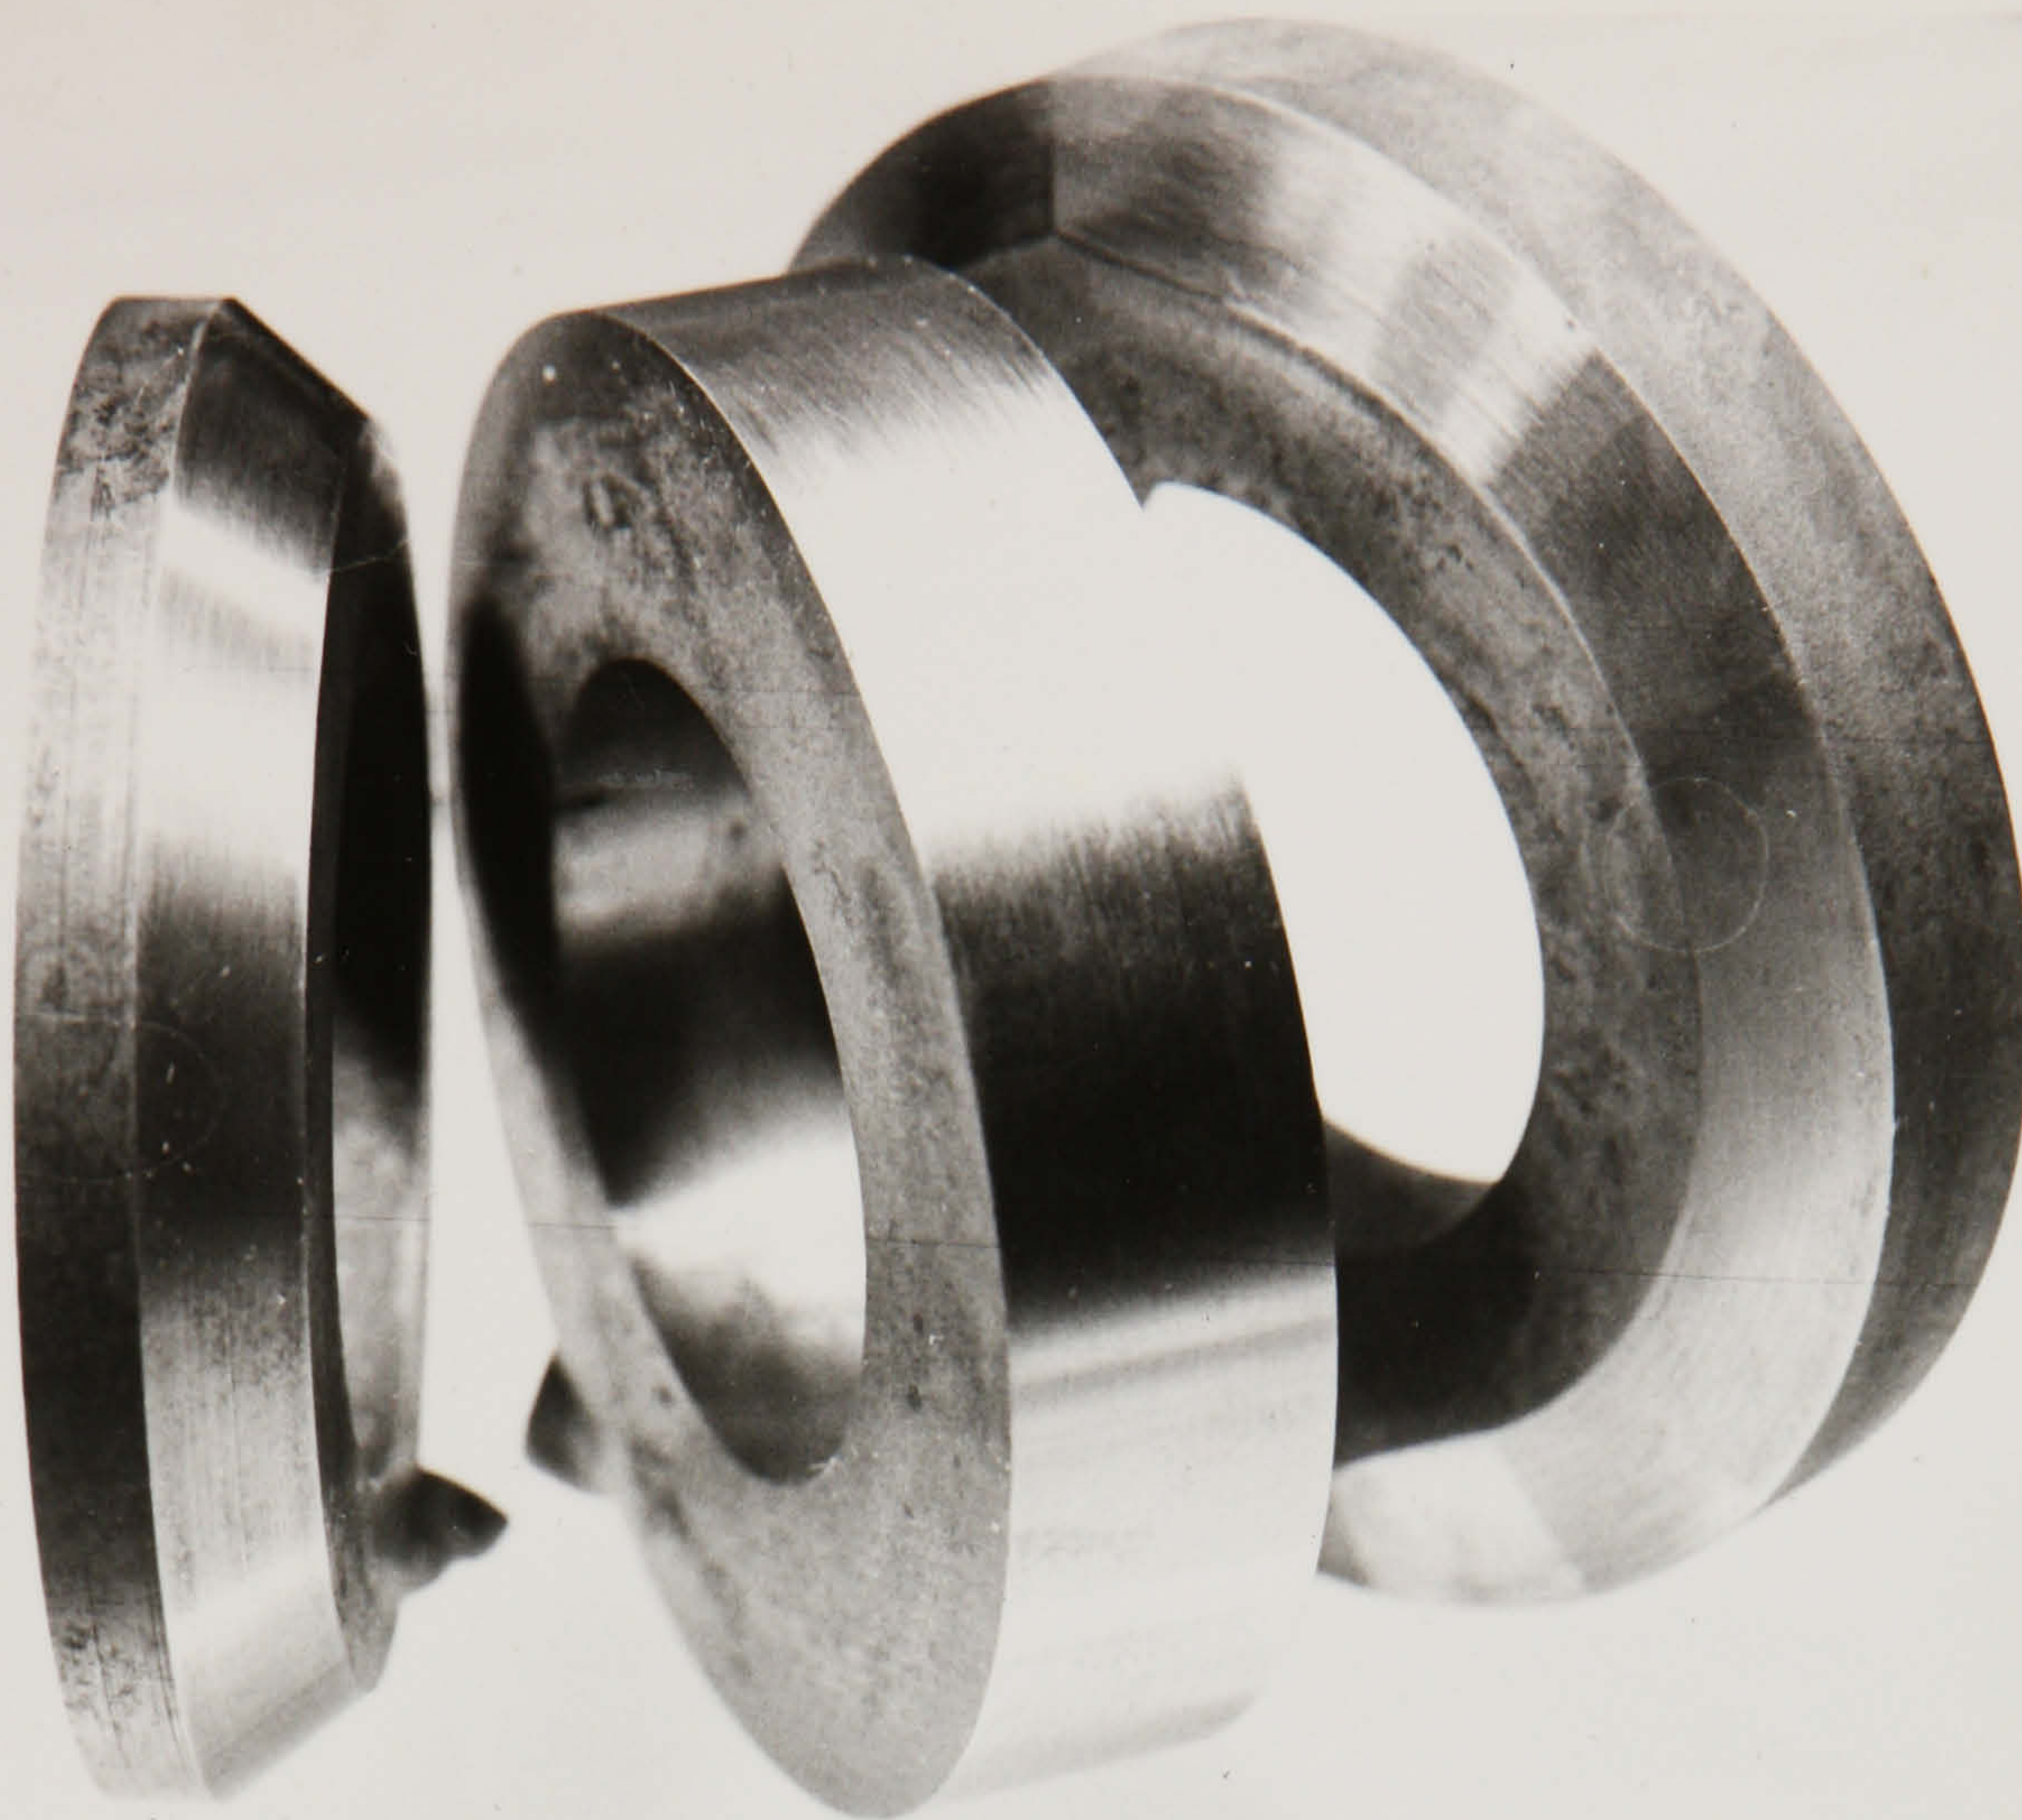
CYLINDRICAL GRINDING SPECIMENS WITH
